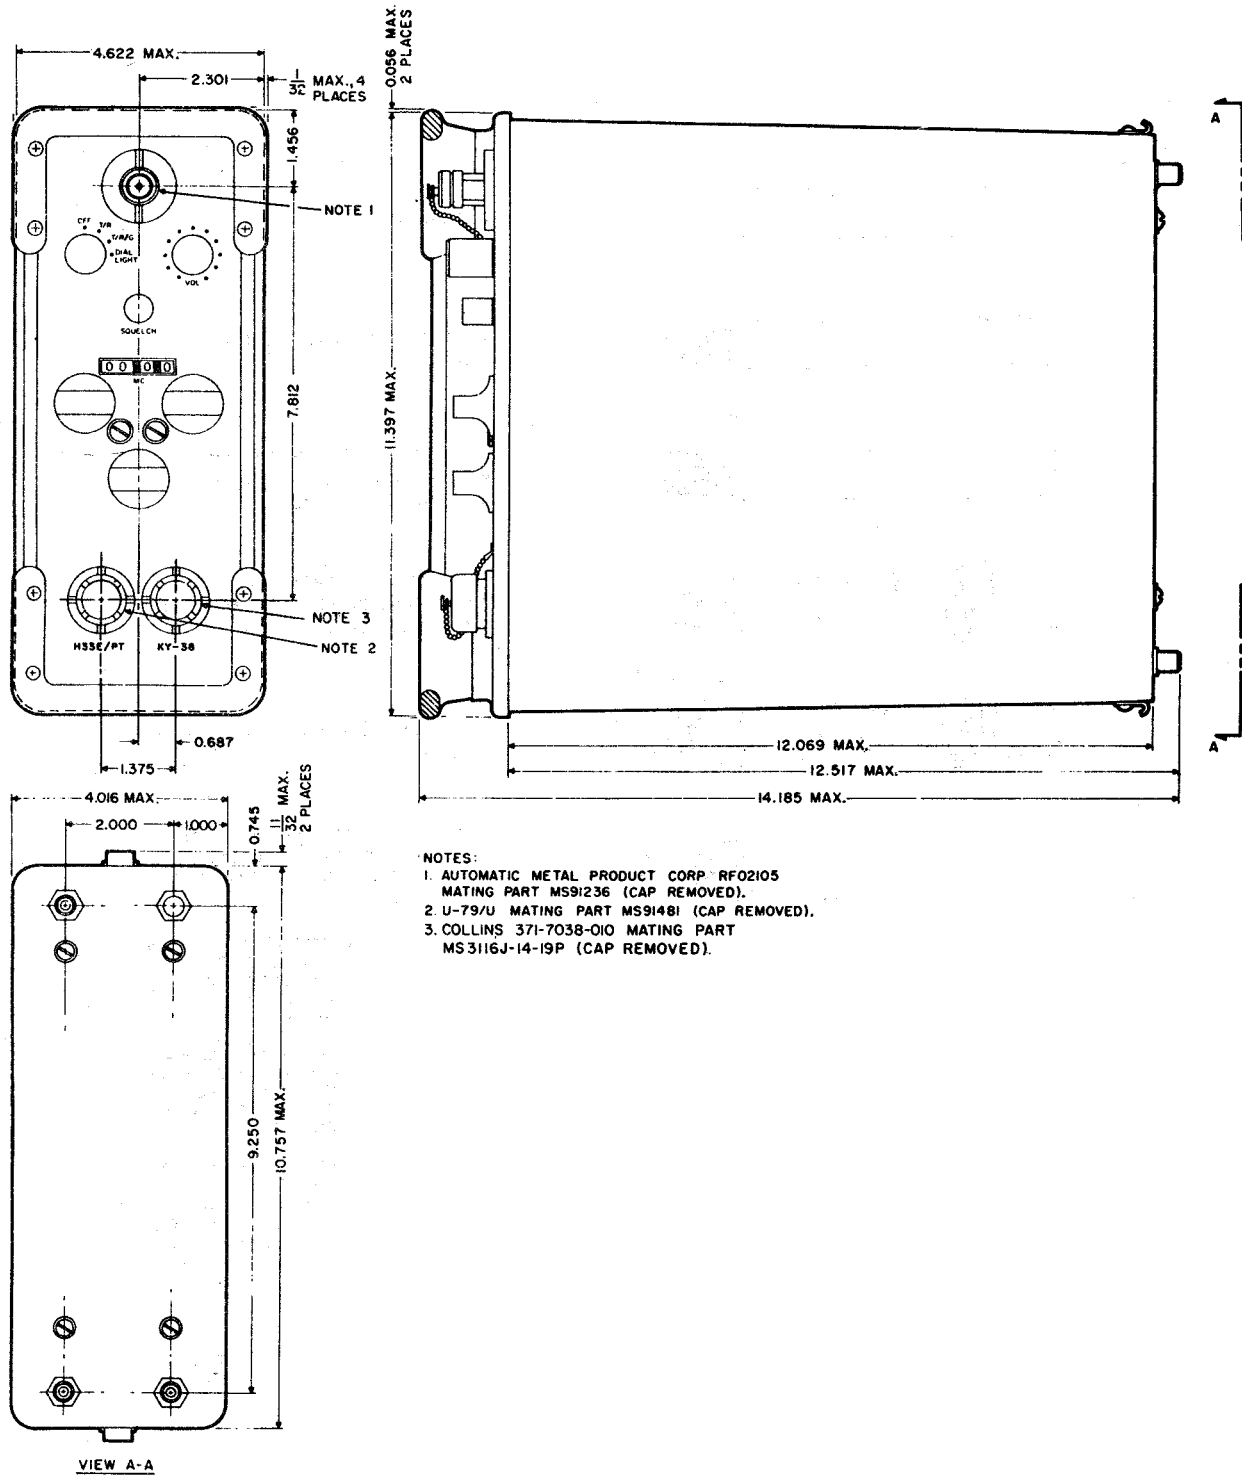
Radio Receiver-Transmitter RT-695A/PRC-41, Outline and Mounting Dimensions
